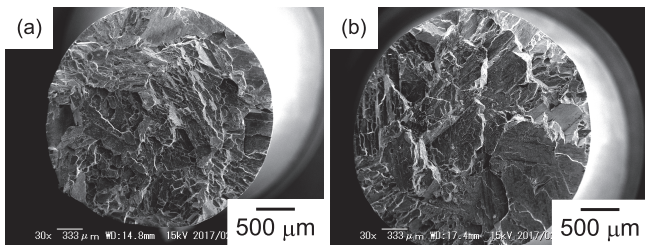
Fracture surfaces of the alloy heat-treated at (a) 1223 K and (b) 1273 K.
